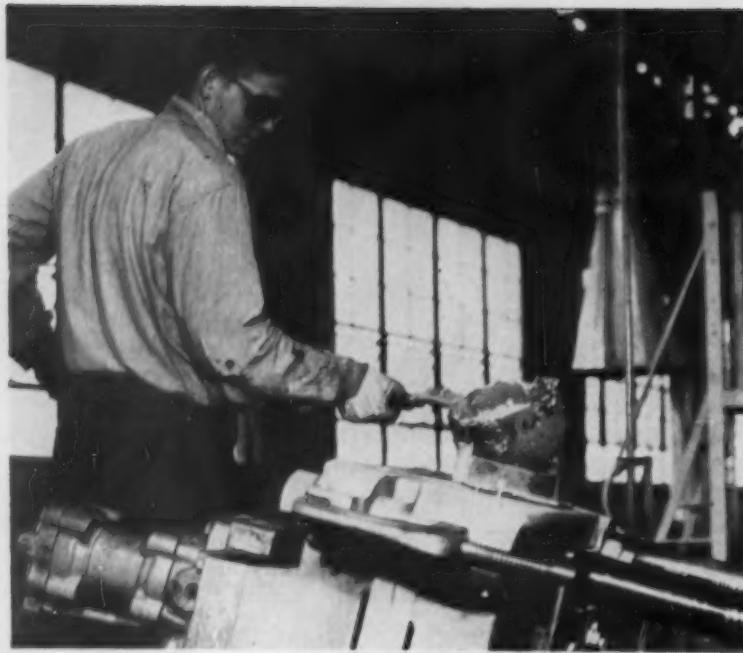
Colloidal graphite mixtures lubricate these mold closing and ejecting mechanisms.
